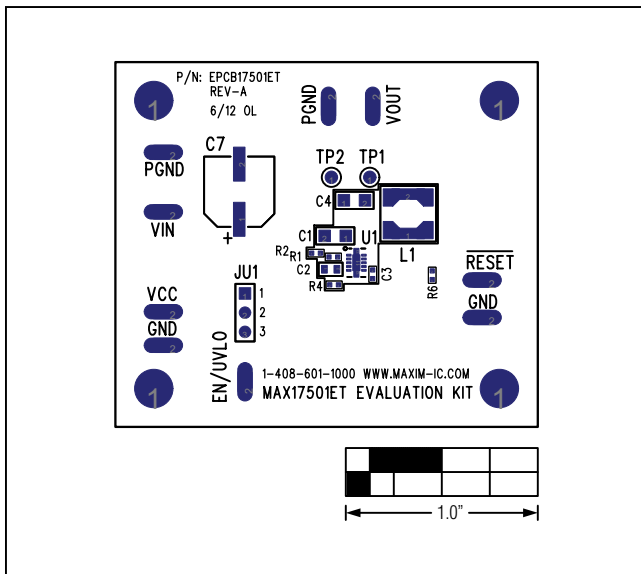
MAX17501E EV Kit Component Placement Guide—Component Side
